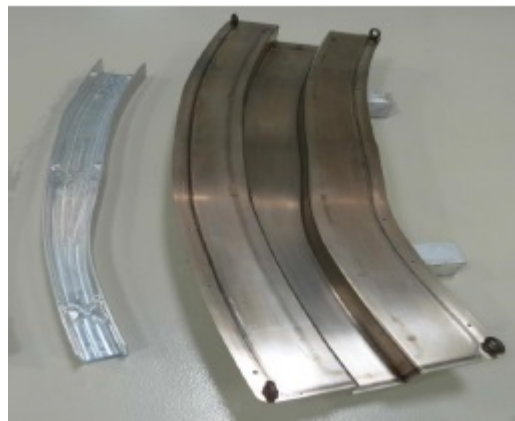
The aluminium caul plate (left) and the INVAR tool (right) used.
